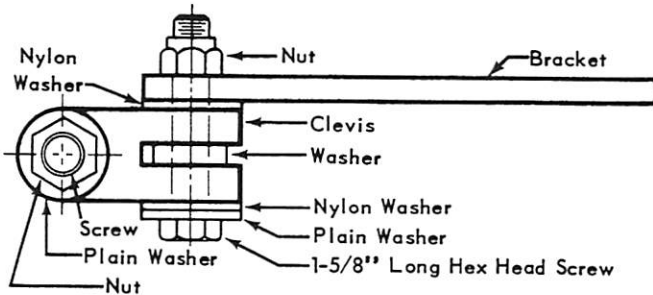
Drawing of Engine Attachment - 40 HP and Larger
